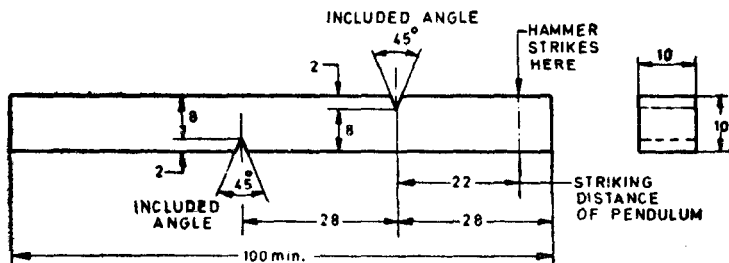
SINGLE-NOTCH SQUARE TEST PIECE
